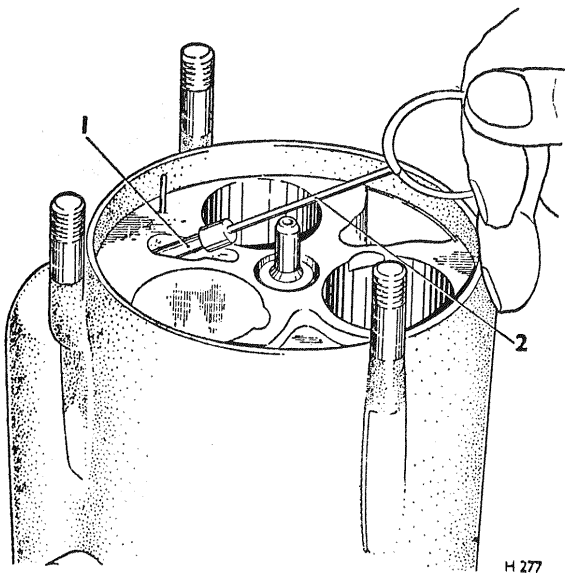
REMOVING THE OIL PICK-UP TUBE
